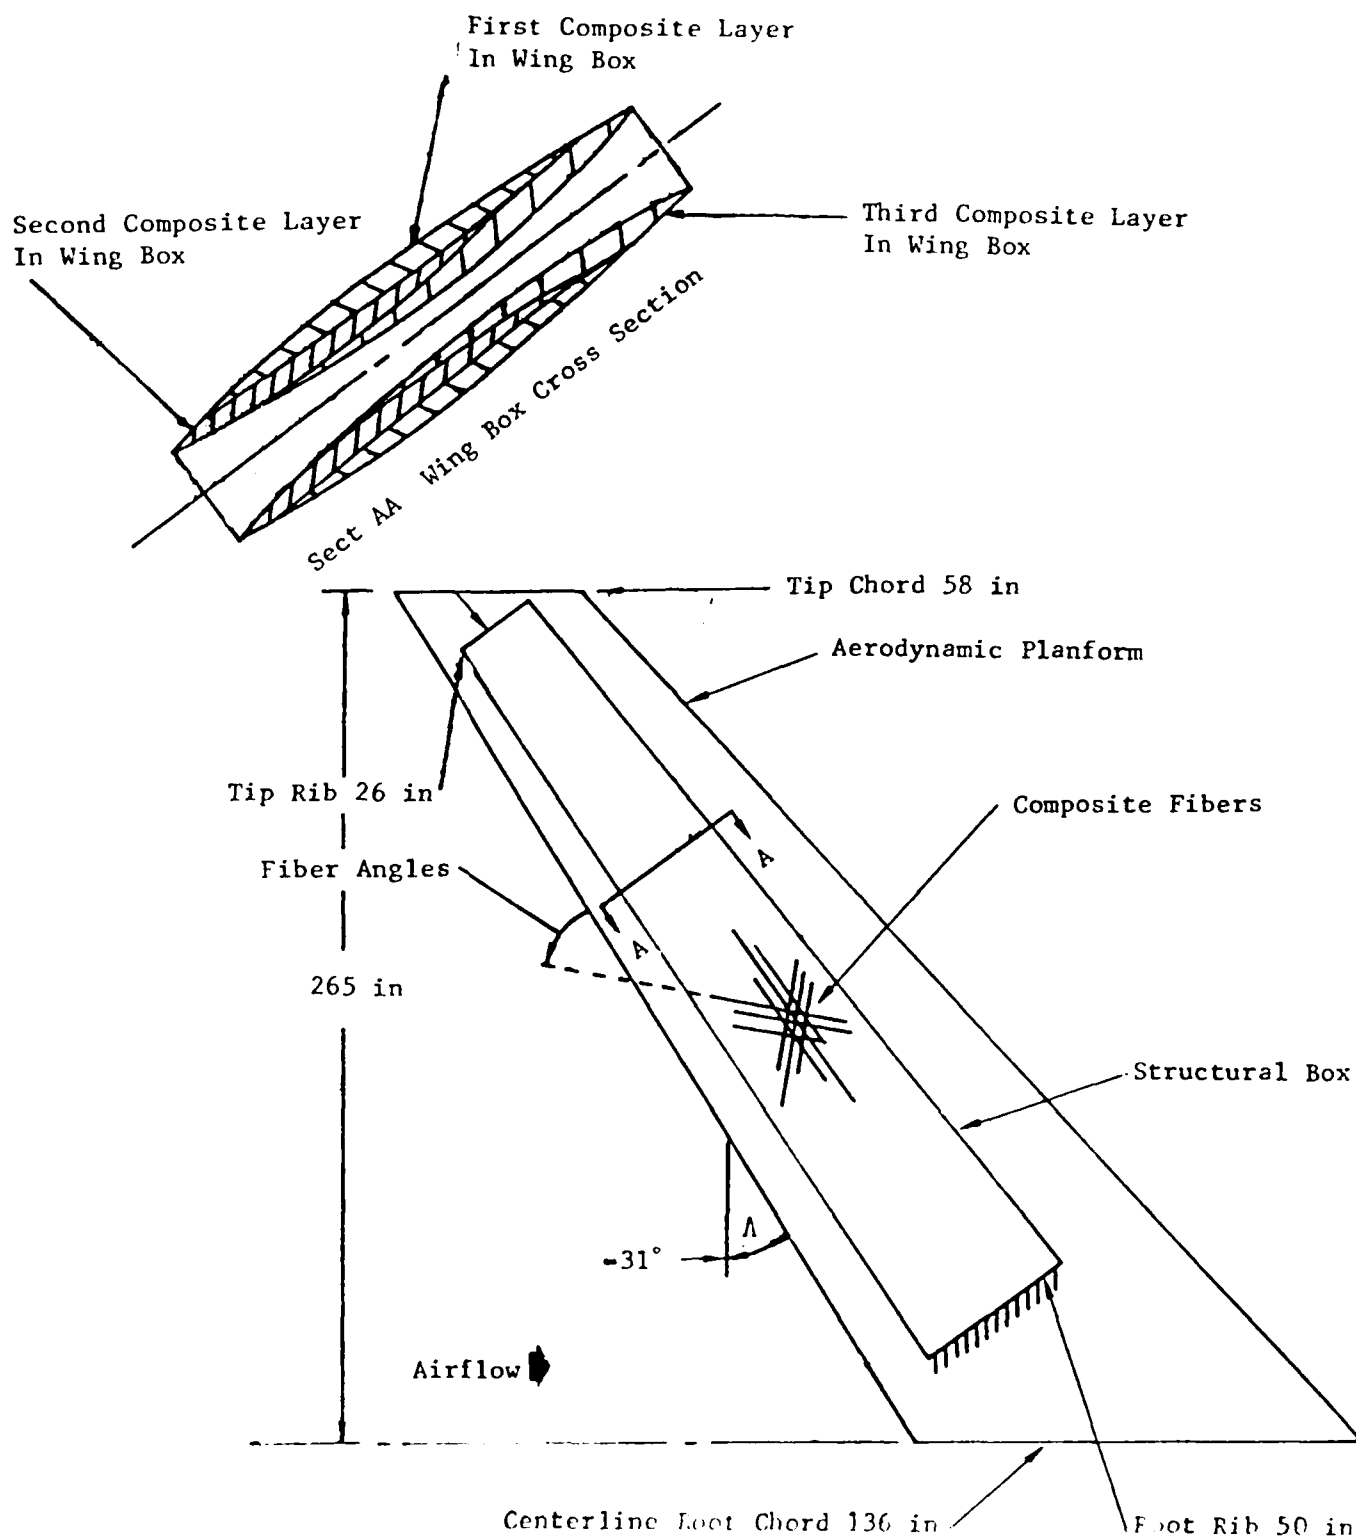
Geometry for Cantilever Wing Planform And Structural Box
